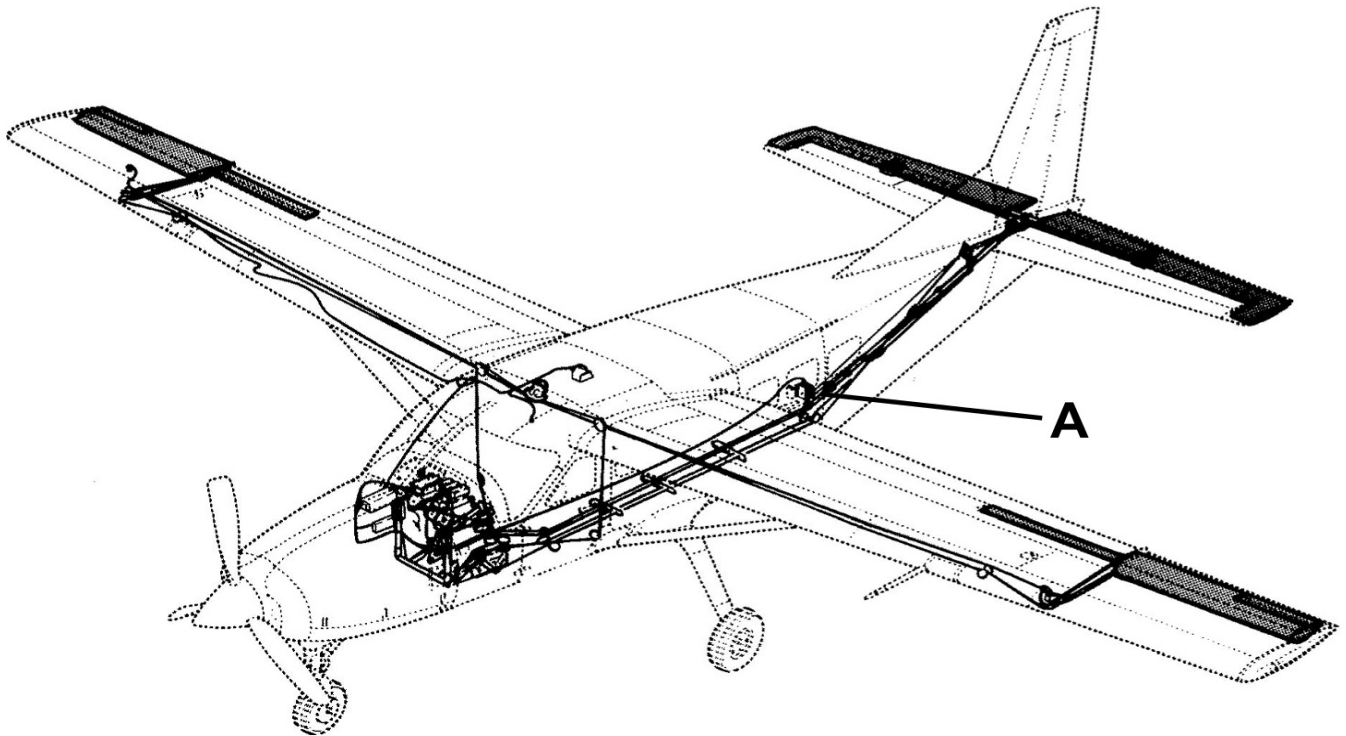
Sheet 1 : Autopilot Pitch Servo Unit Installation
